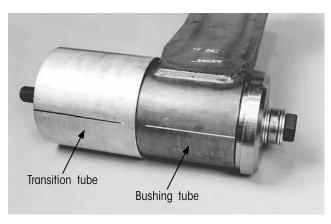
Align lines for proper bushing orientation (TF II bushing tool shown)
